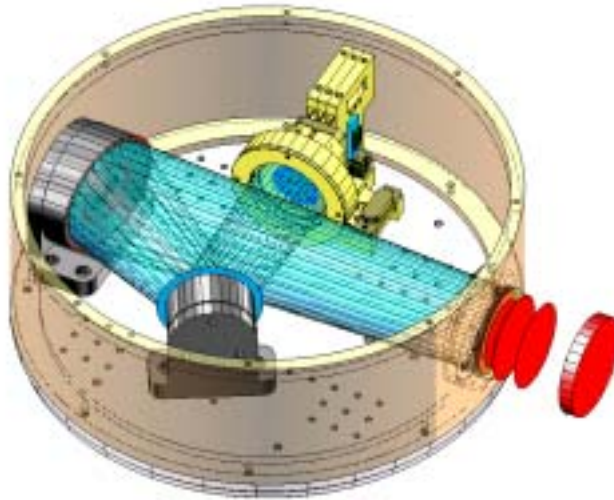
THUMPER cold surface optics and Helium shield. Projecting from the Helium shield on a snout will be a corrector plate and blocking filters. The bandpass filter will go directly over the Winston cones.
